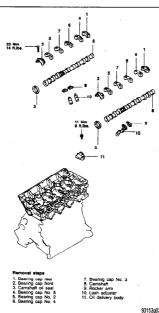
Camshaft, rocker arm and shaft assemblies-1.6L and 2.0L DOHC engines
